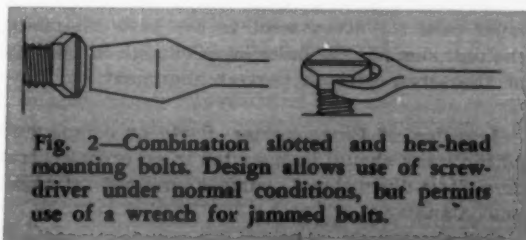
Combination slotted and hex-head mounting bolts. Design allows use of screwdriver under normal conditions, but permits use of a wrench for jammed bolts.
